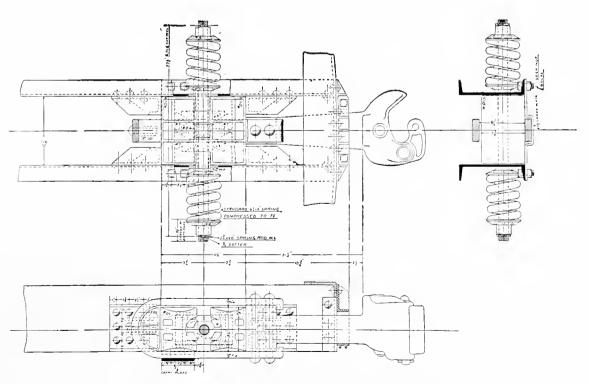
Cardwell Friction Draft Gear, Type G-8.
